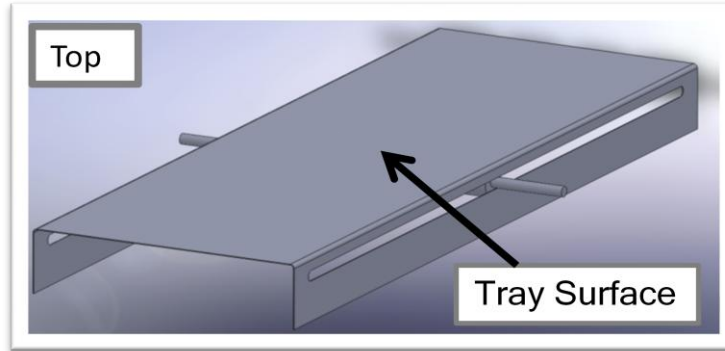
Second Tray design; 26 Gauge sheet metal glides over existing feed roller. Slots cut in each side for guidance.
